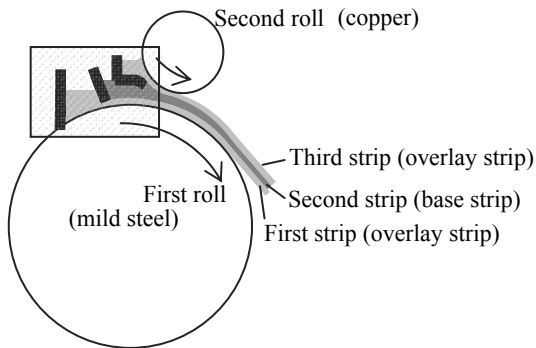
Schematic illustration showing the roll caster to cast the three layers clad strip. This caster is suitable to cast clad strip as below. The liquidus line of the base strip is lower than that of the overlay strip
